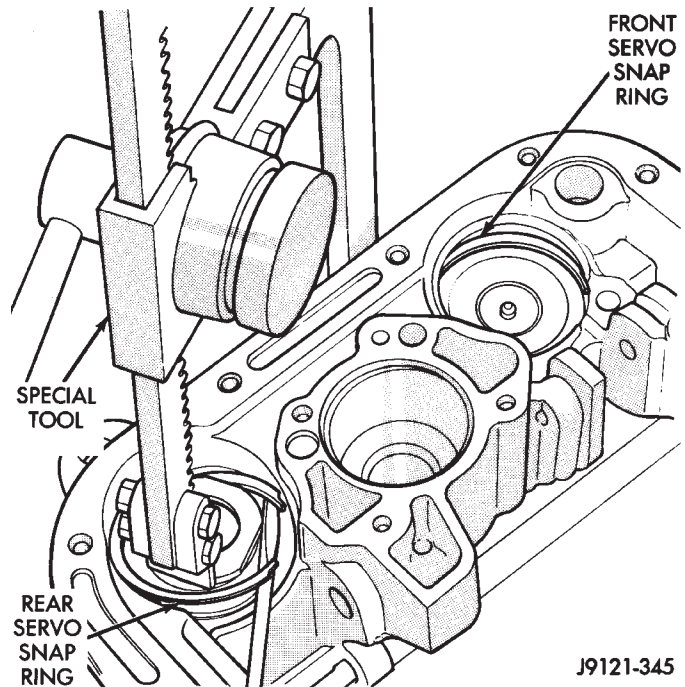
Compressing Front Servo Rod Guide (42RH)
